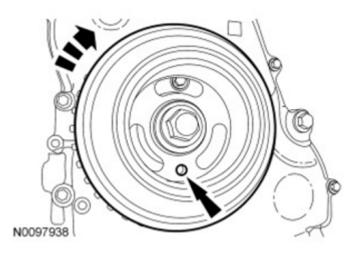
Locating Crankshaft Pulley Hole Courtesy of FORD MOTOR CO.
